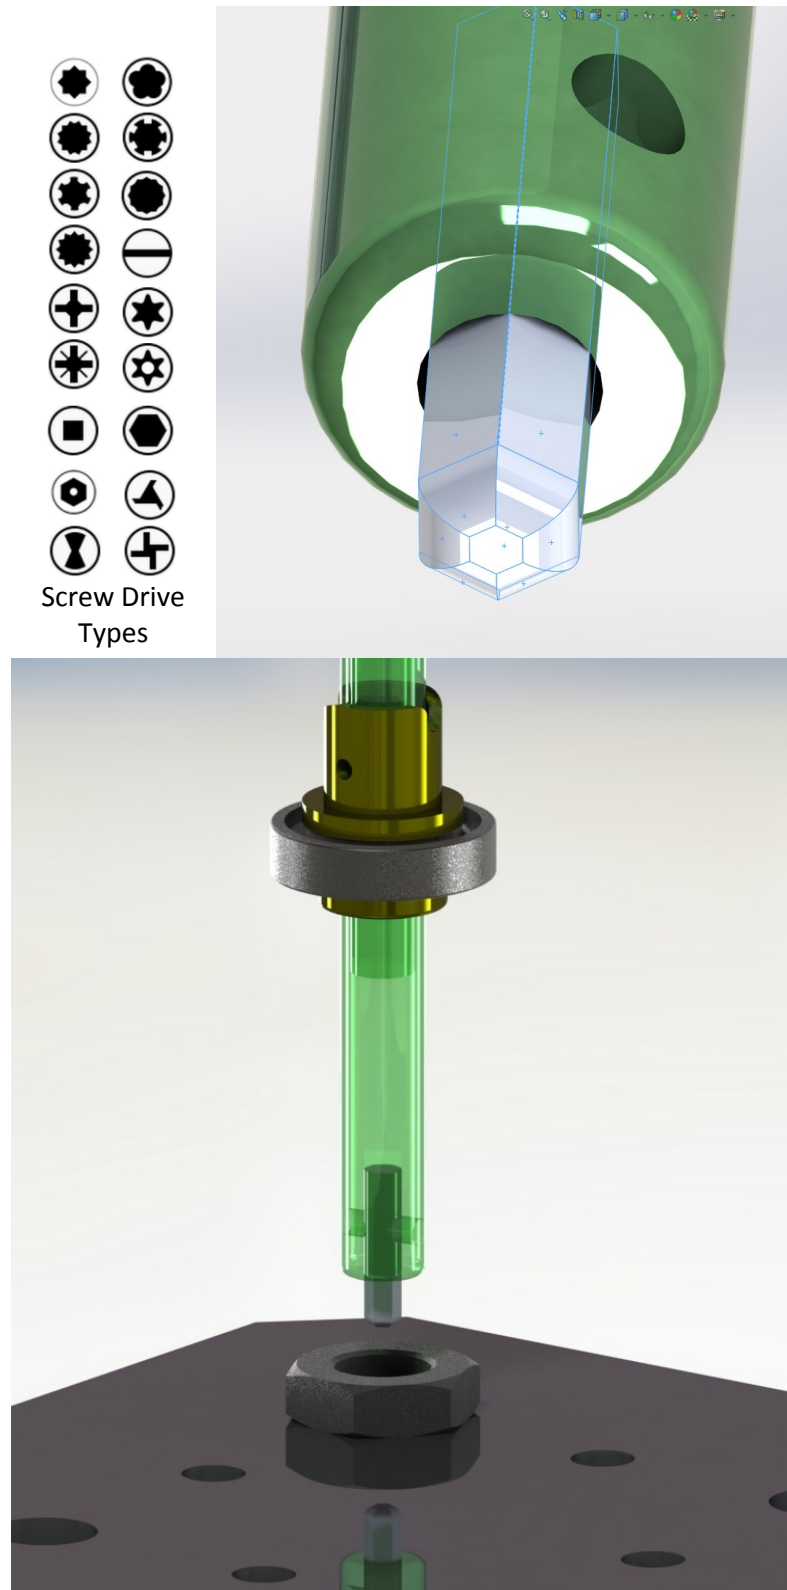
(a) Compatible driving surfaces with automated tuner (b) 3D drawing of replaceable tuner head (c) Transparent view of tuner head.
